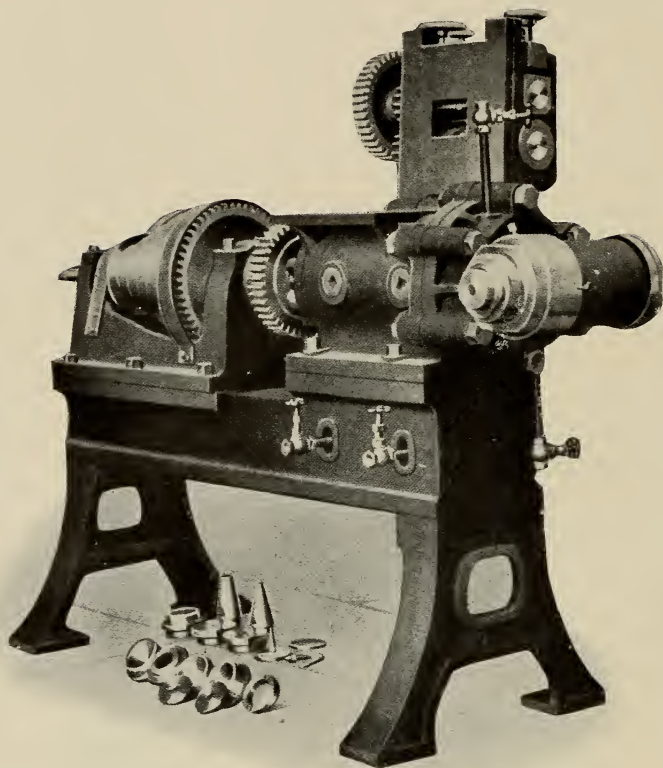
THE BRIDGE TUBING MACHINE FEED OPEN.
